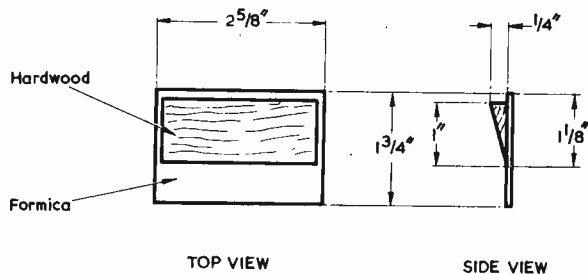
The wedge assembly. This tilts the 'Ringer' slightly forwards so that its front is in the same plane as the front panel of the housing
